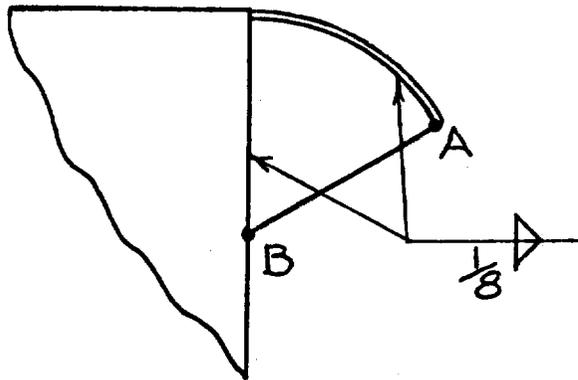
Welds between Pipe Section, 3/16 in. Plate and Lid.
